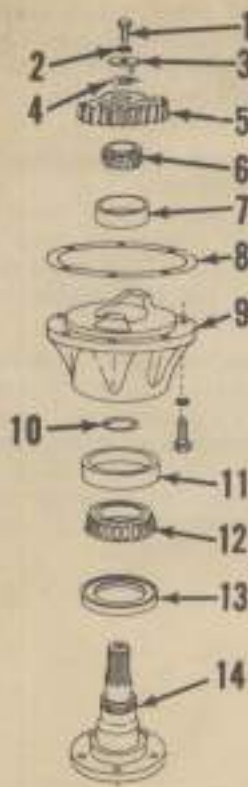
On single front wheel tricycle models, above parts are used in steering gear instead of items 53 through 62 shown in Fig. 7. Mark on hub of sector gear (5) must be aligned with punch mark on top of sector shaft (14).
